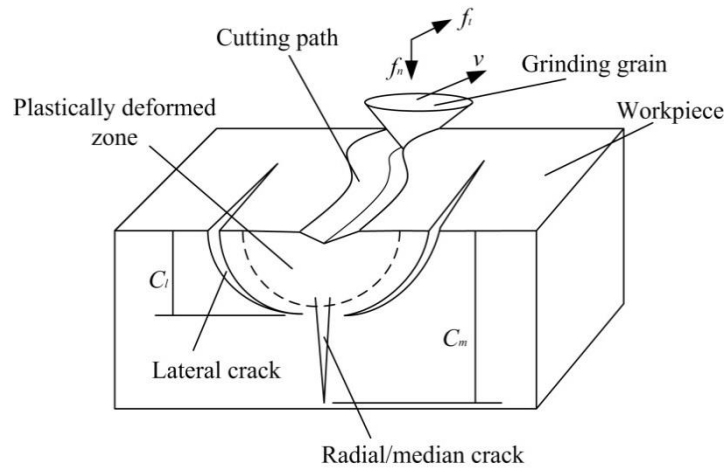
Schematic of an abrasive grain removing material from a brittle workpiece via brittle-mode grinding
